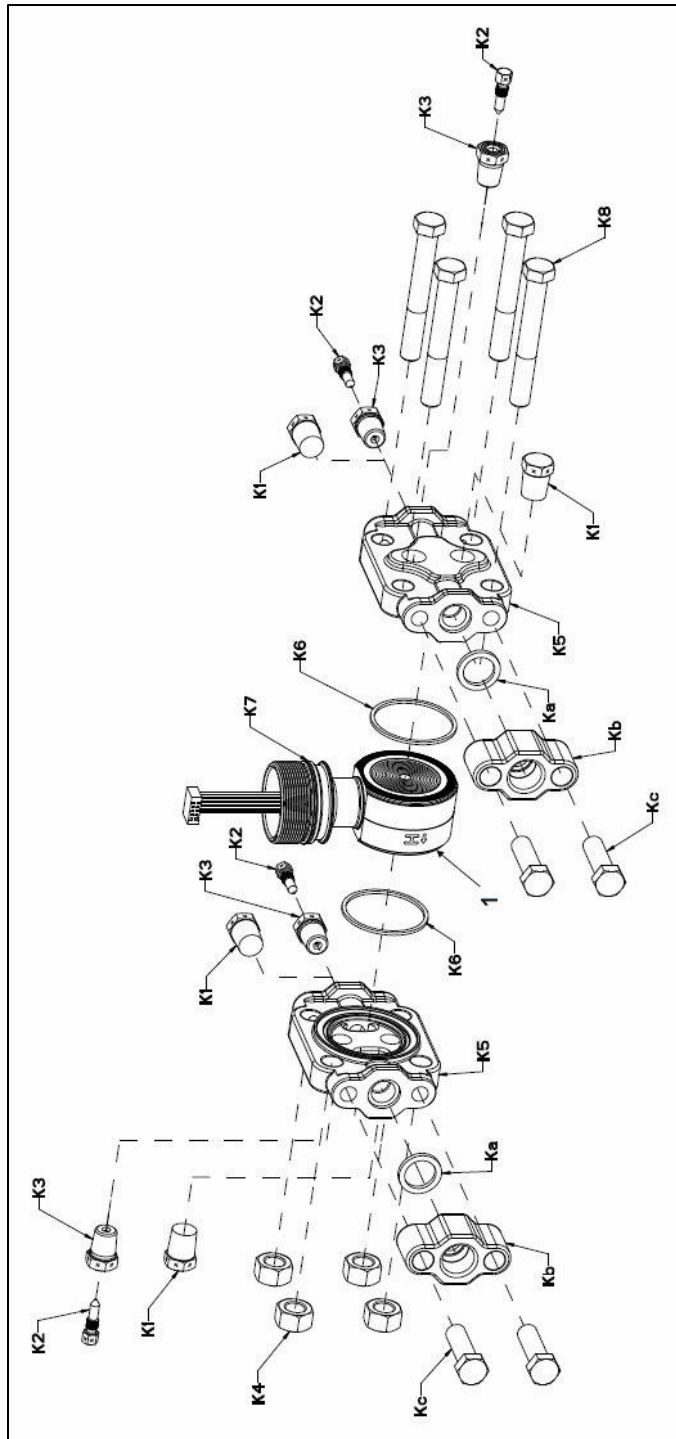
ST 800 Models STD810, 820, 825, 830, & 870
